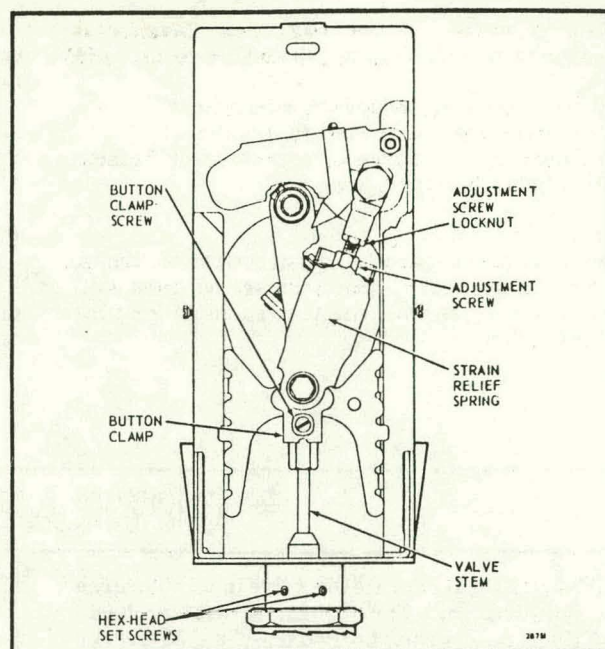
MOUNTING THE Q601 LINKAGE AND MOTOR ON THE VALVE.
